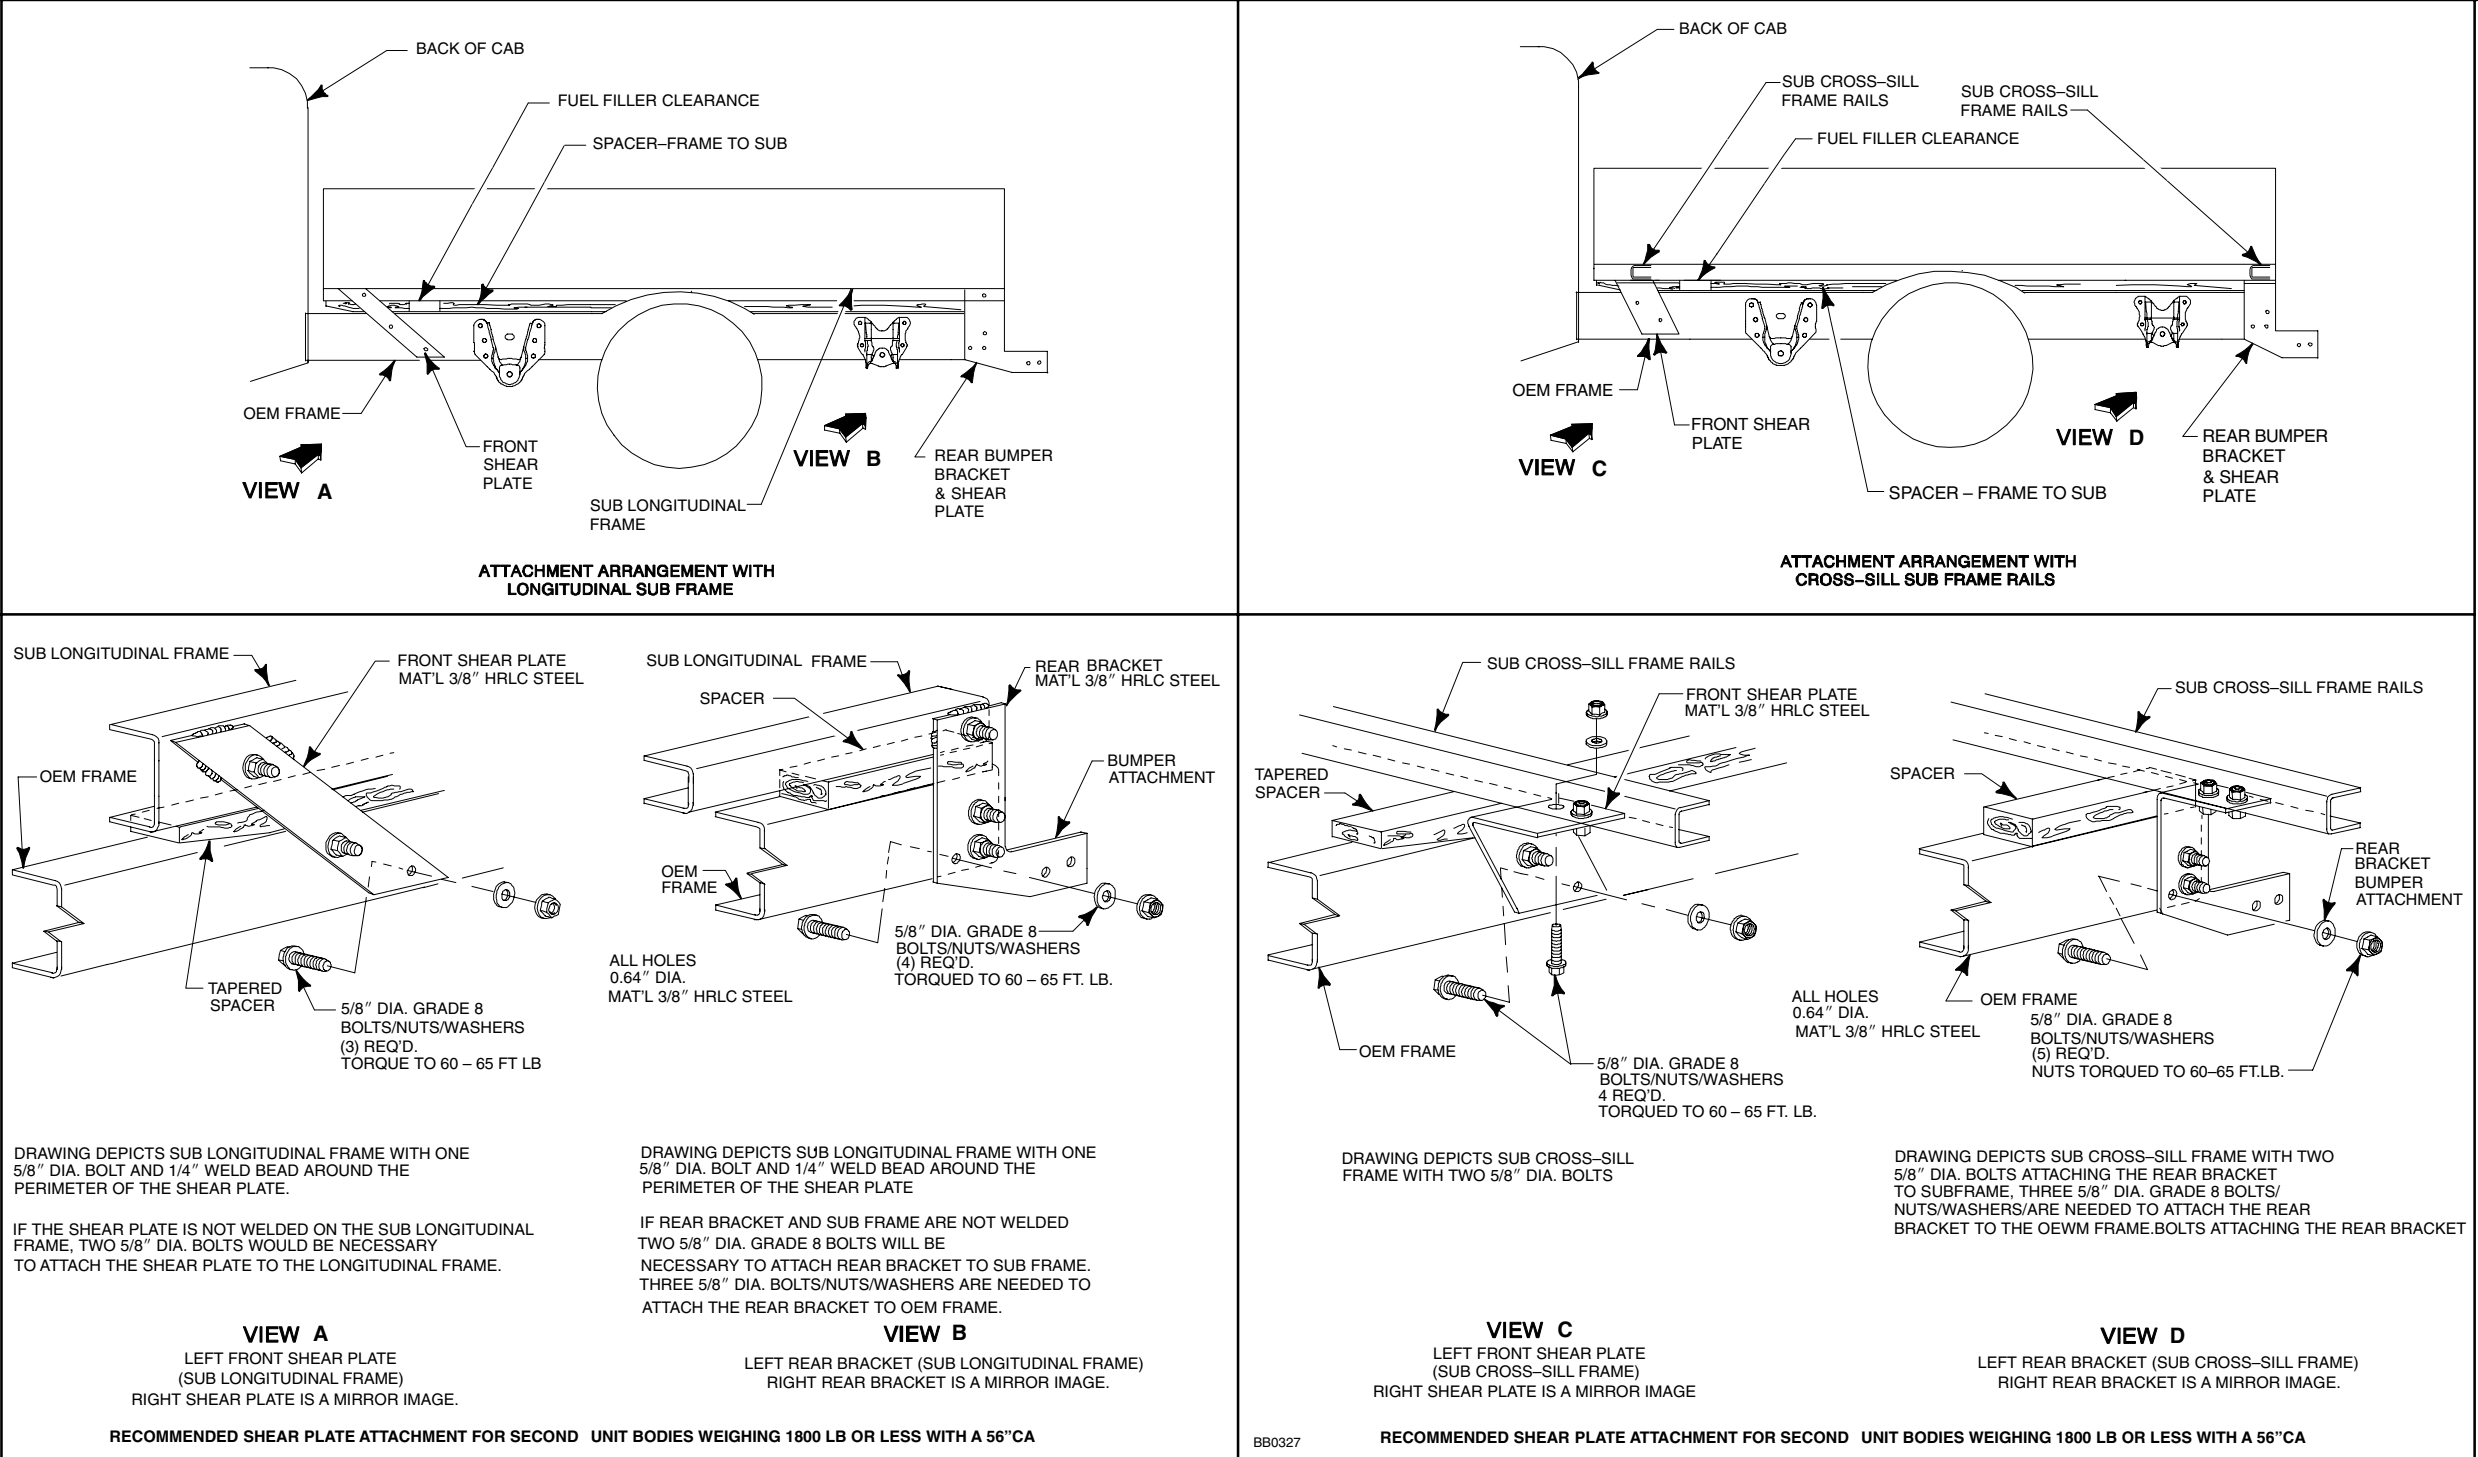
FIGURE A - SUPER DUTY F-SERIES SUB MOUNTING TECHNIQUE #1
